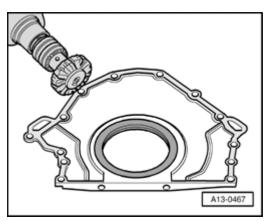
Using Rotating Plastic Brush To Remove Remaining Sealant From Rear Sealing Flange And At Cylinder Block
